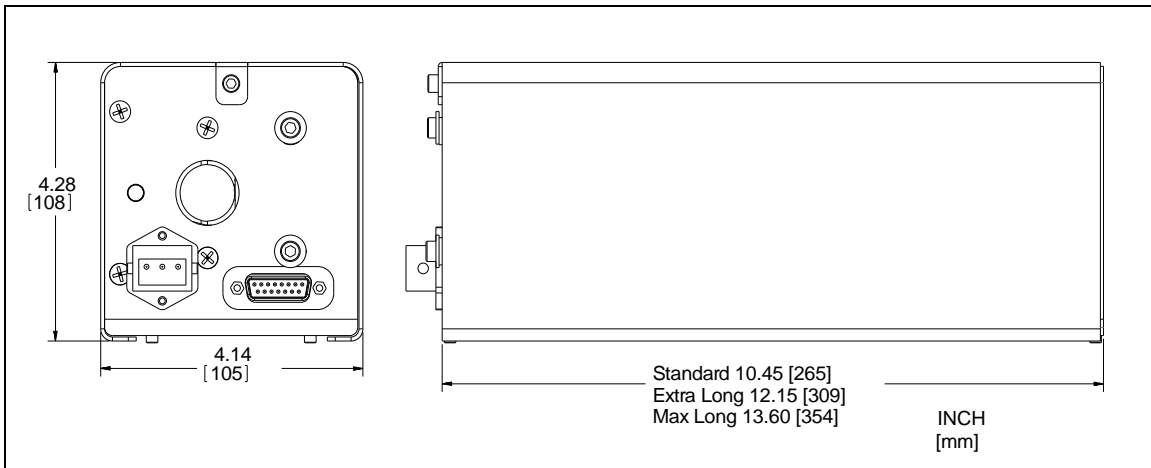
, Model 391 Rotary Motor Assembly Reference Dimensions
